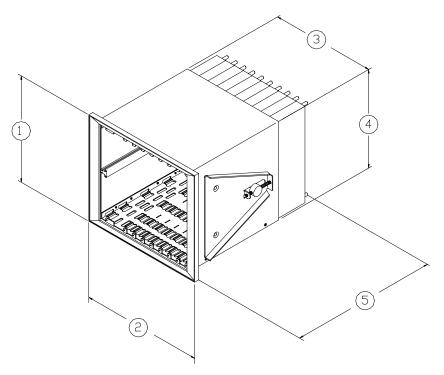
3500 Mini-rack mounting dimensions for the Panel Mount Configuration
